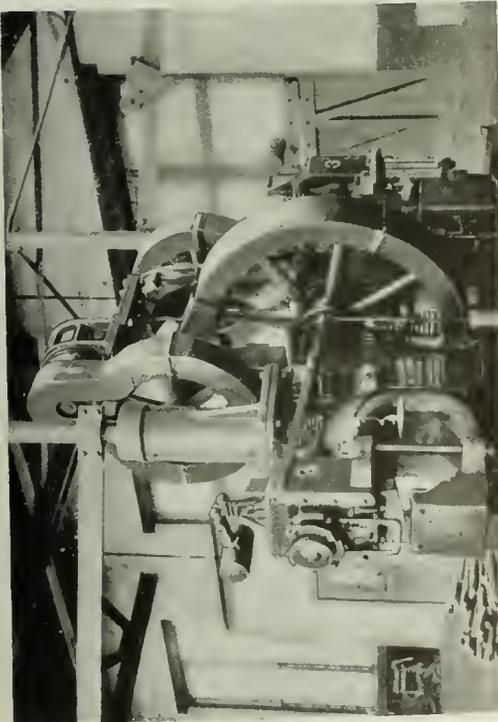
10-h.p., 550-volt, 750-r.p.m., Form K Motor Driving Shear and Punch in Railroad Shop
